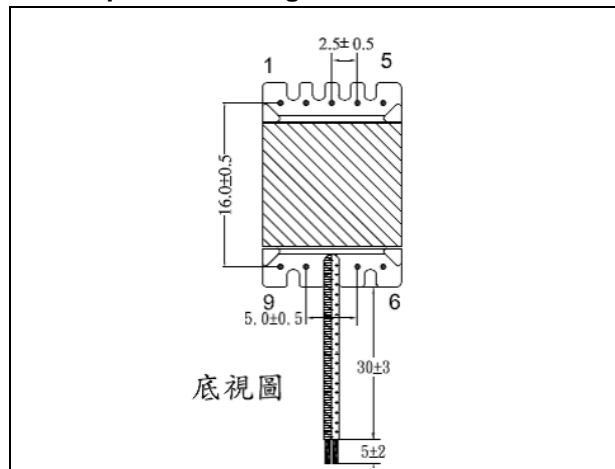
Dimensional drawing and pin placement diagram - electrical diagram
